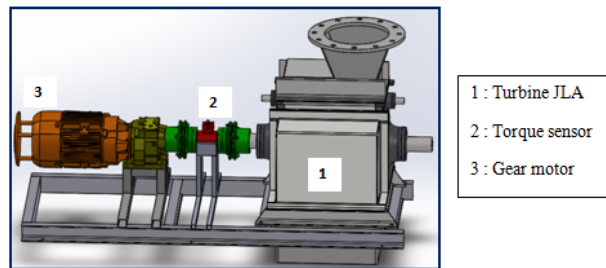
3D design of JLA turbine, torque sensor and gear motor coupled with KTR coupling.
